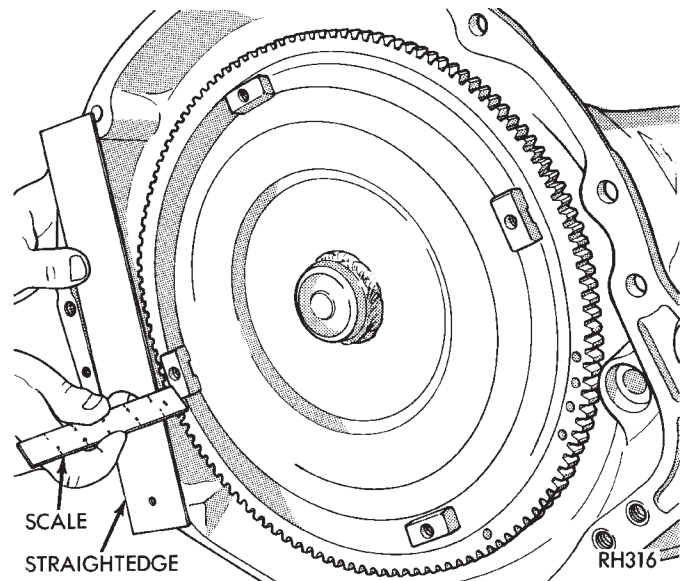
Checking Torque Converter Seating—Typical GEARSHIFT CABLE
